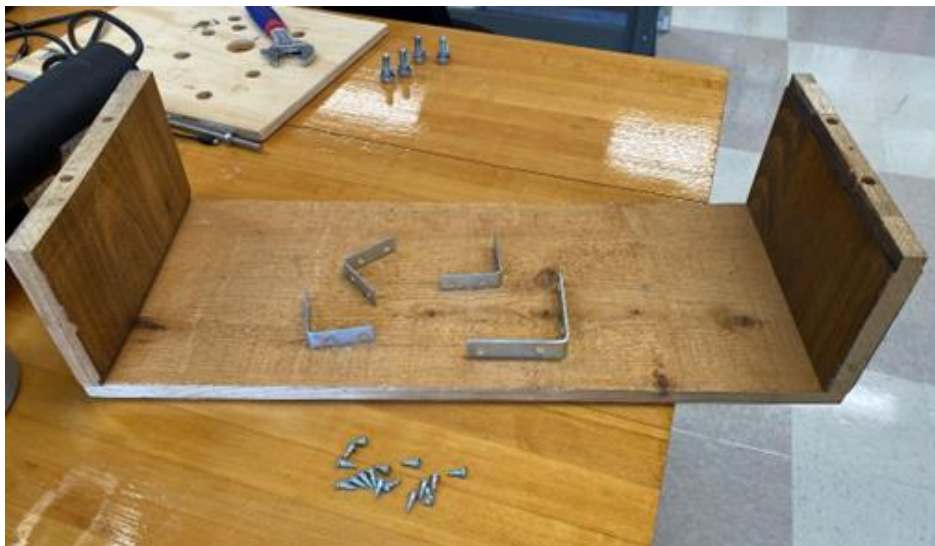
Components for the motor stand. The M10 bolts can be seen at the top.
